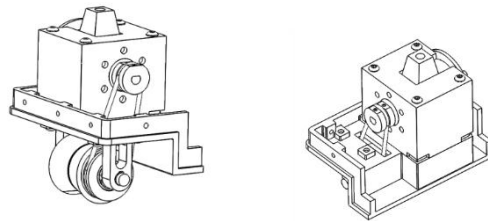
Simplified scheme of scanner section including the encoder, o-ring and coupled wheel.
